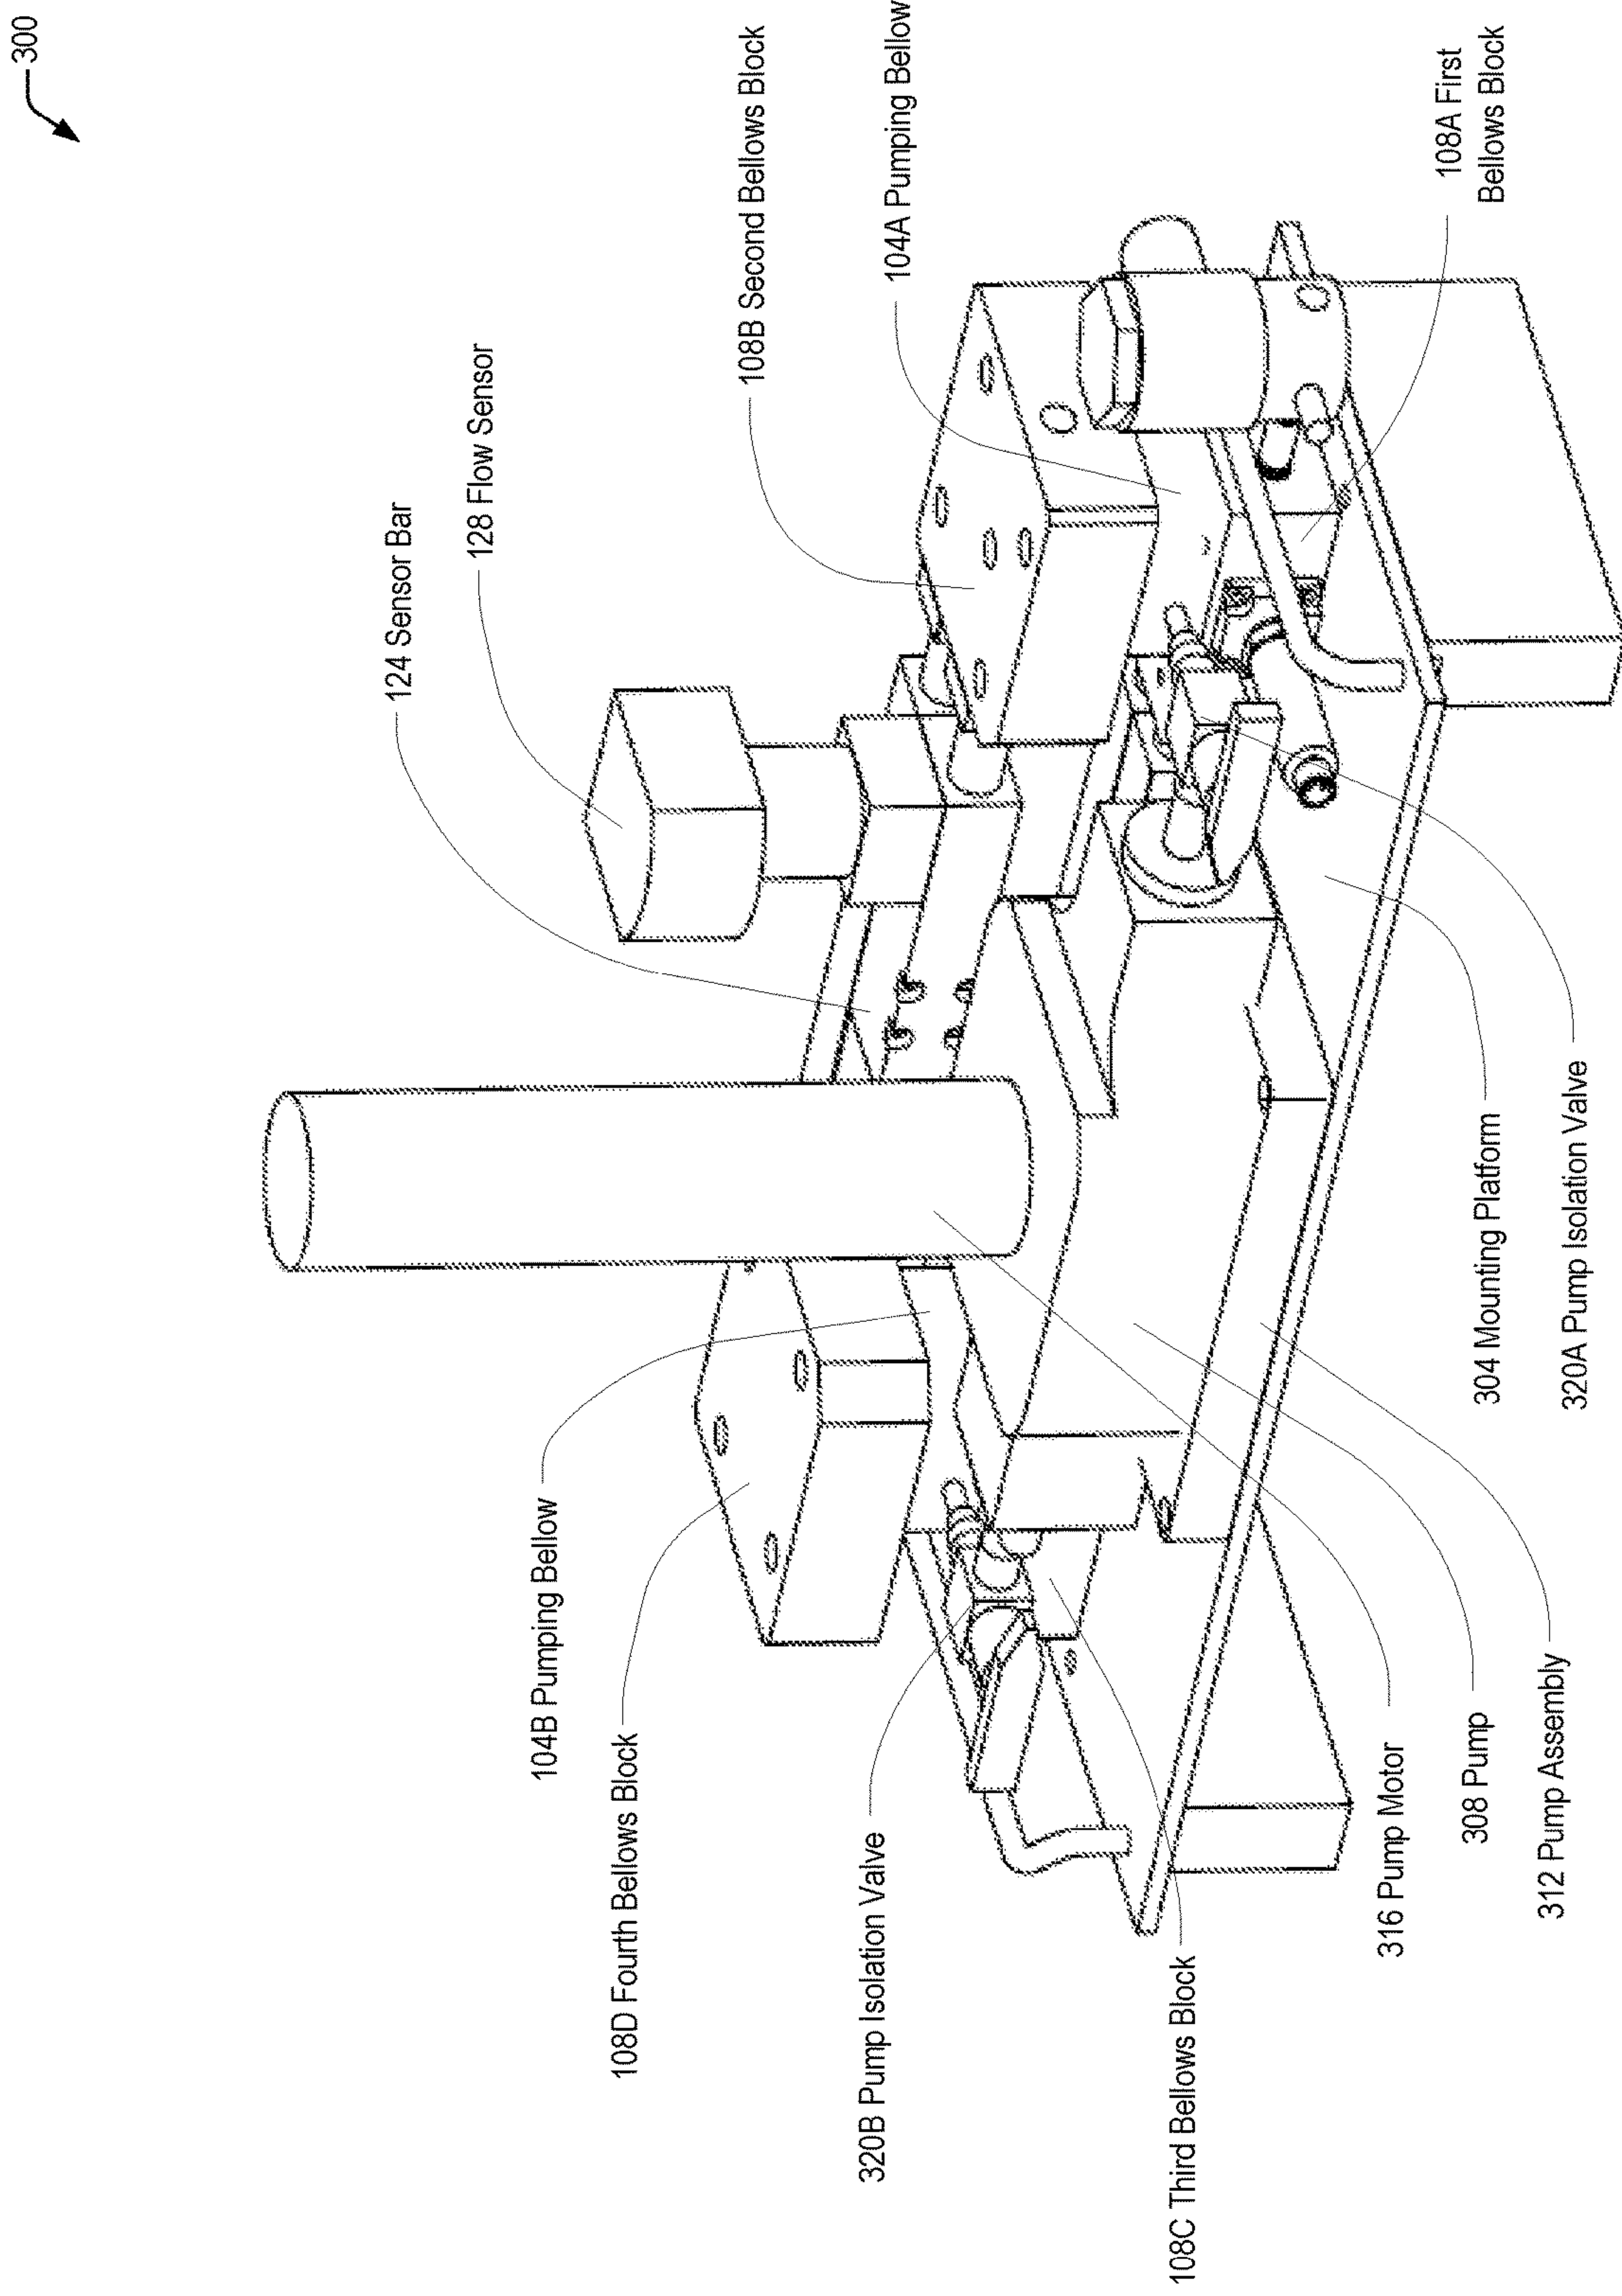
B Fluid Transfer System With Separated Pump Assembly of First Embodiment
